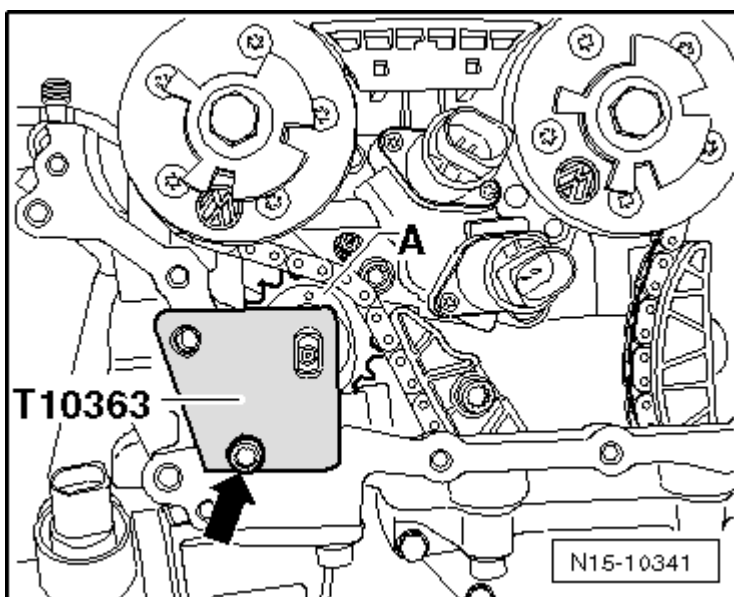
Securing Position Of Drive Pinion For High Pressure Pump Using Adjustment Tool T10363
